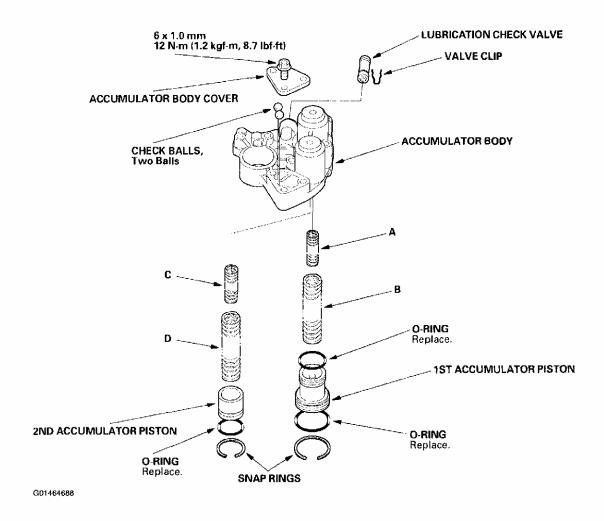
Exploded View Of The Accumulator Body Courtesy of AMERICAN HONDA MOTOR CO., INC.
